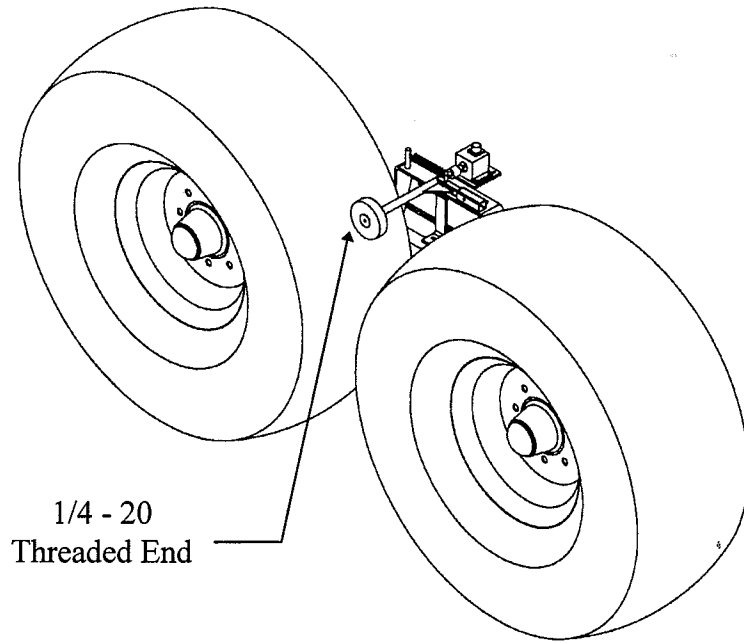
Isometric view of encoder assembly positioned on the tandem axle.
